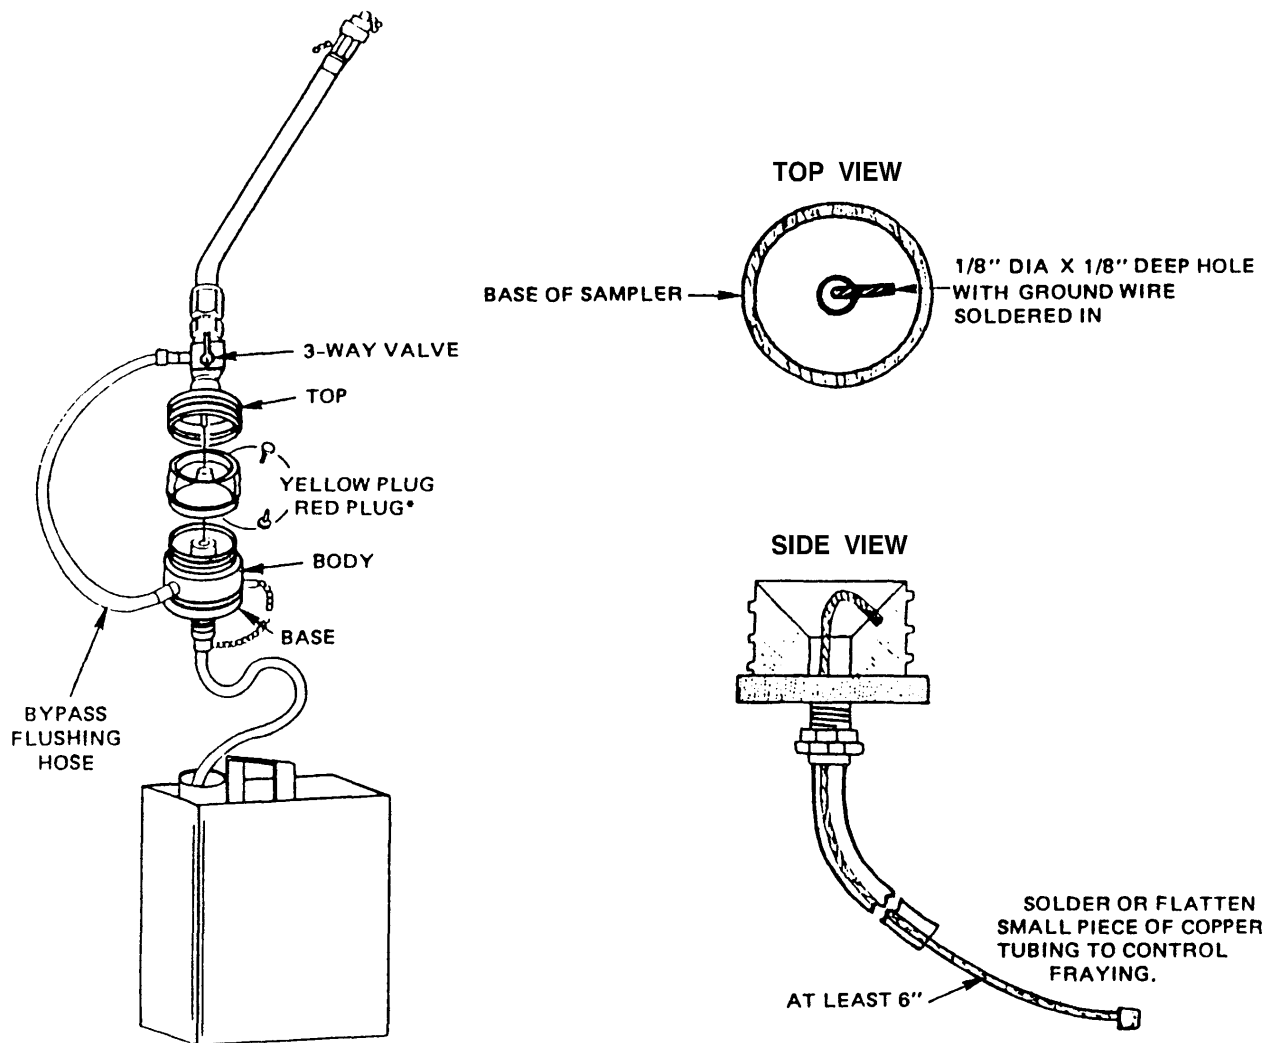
Bonding Wire for Millipore In-Line Sampler
